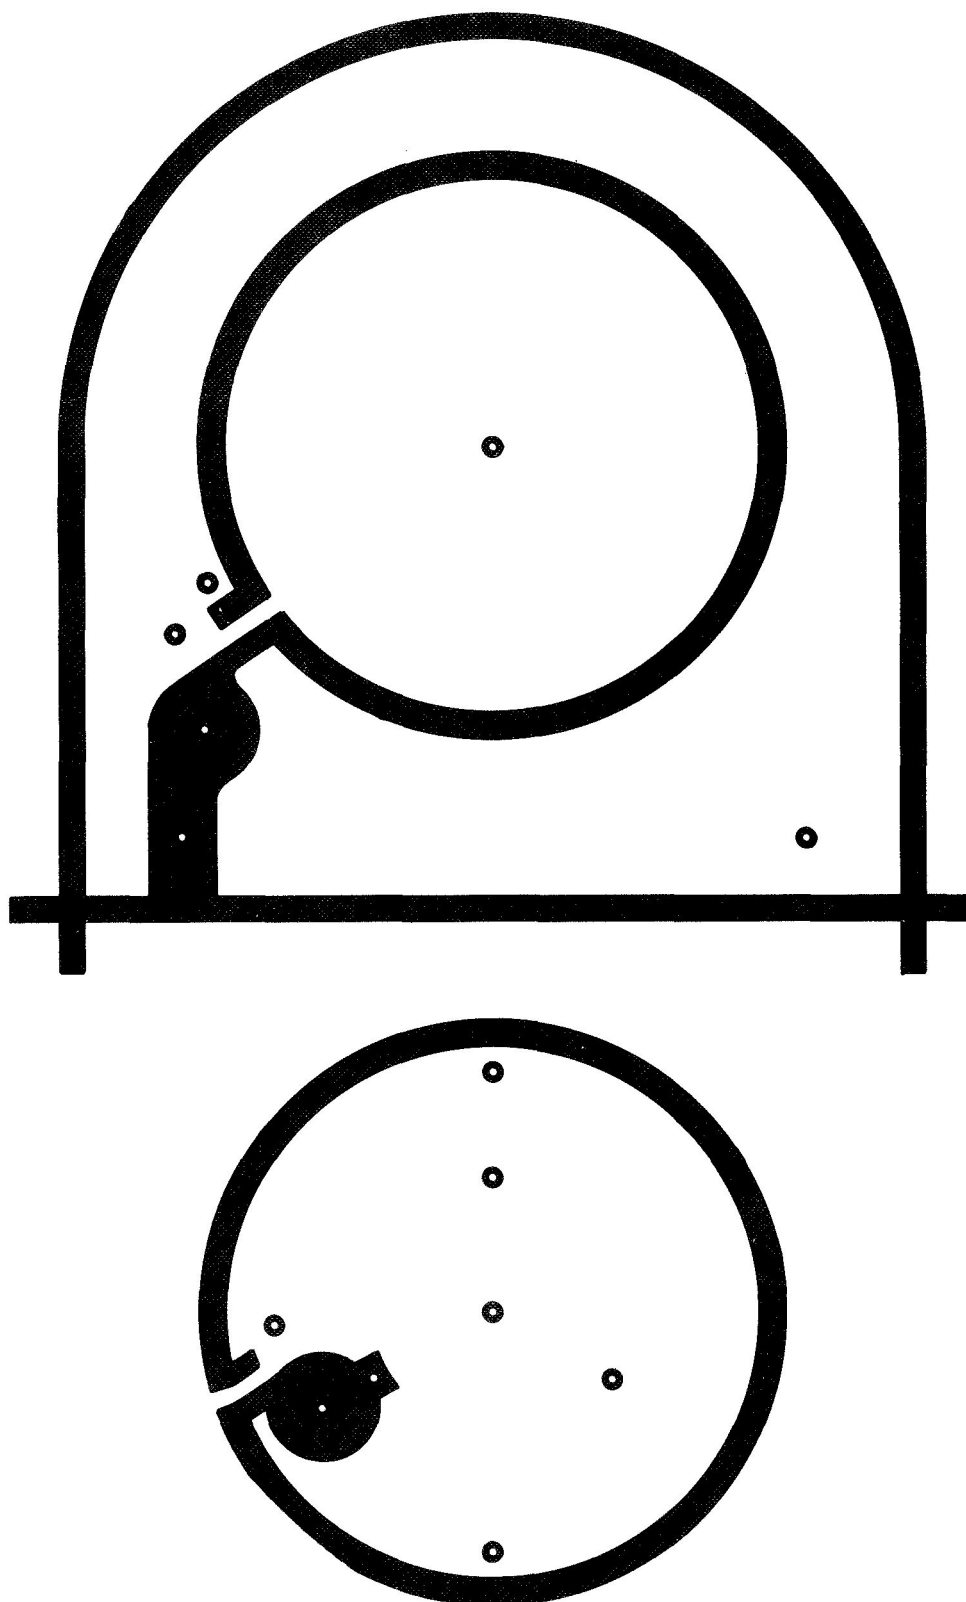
ROTARY-JOINT PRINTED-CIRCUIT LAYOUT.
